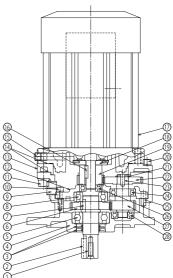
Type CVVM (6000SK Series Vertical, Gearmotor) (Ex.: Frame size 6075SK)
